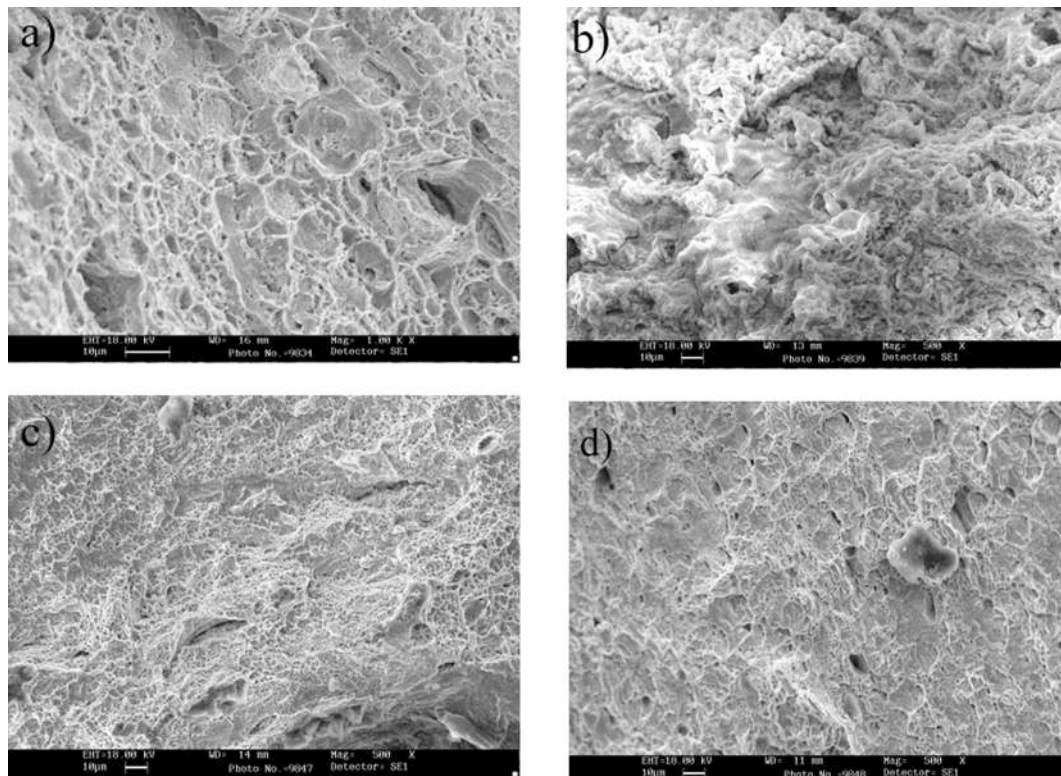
Appearance of the fracture surface of the tensile tests samples for Exp. No of a) 27, b) 19, c)15, d)27.
